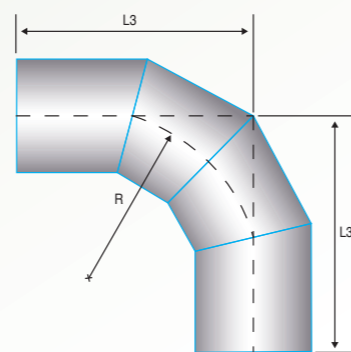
Gusseted bend type 3 over 60° up to 90°
